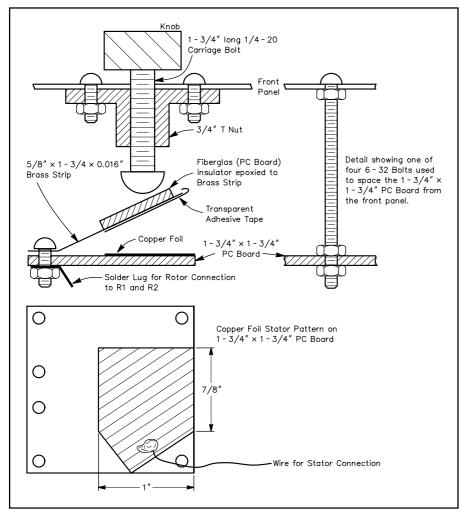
Mechanical assembly of C3; see text and accompanying photographs.
